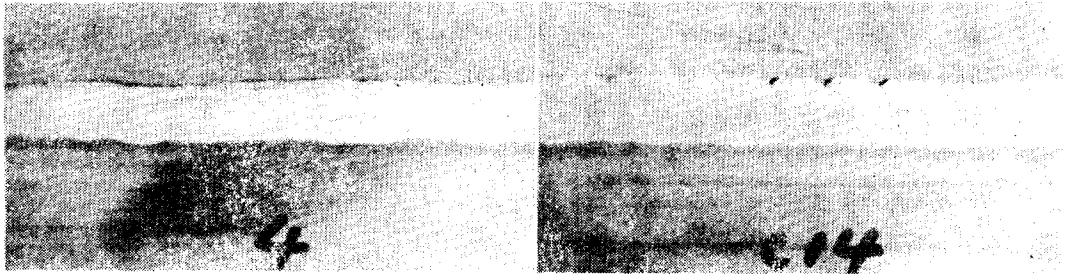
Penetration lines welded with and without auxiliary equipment.
